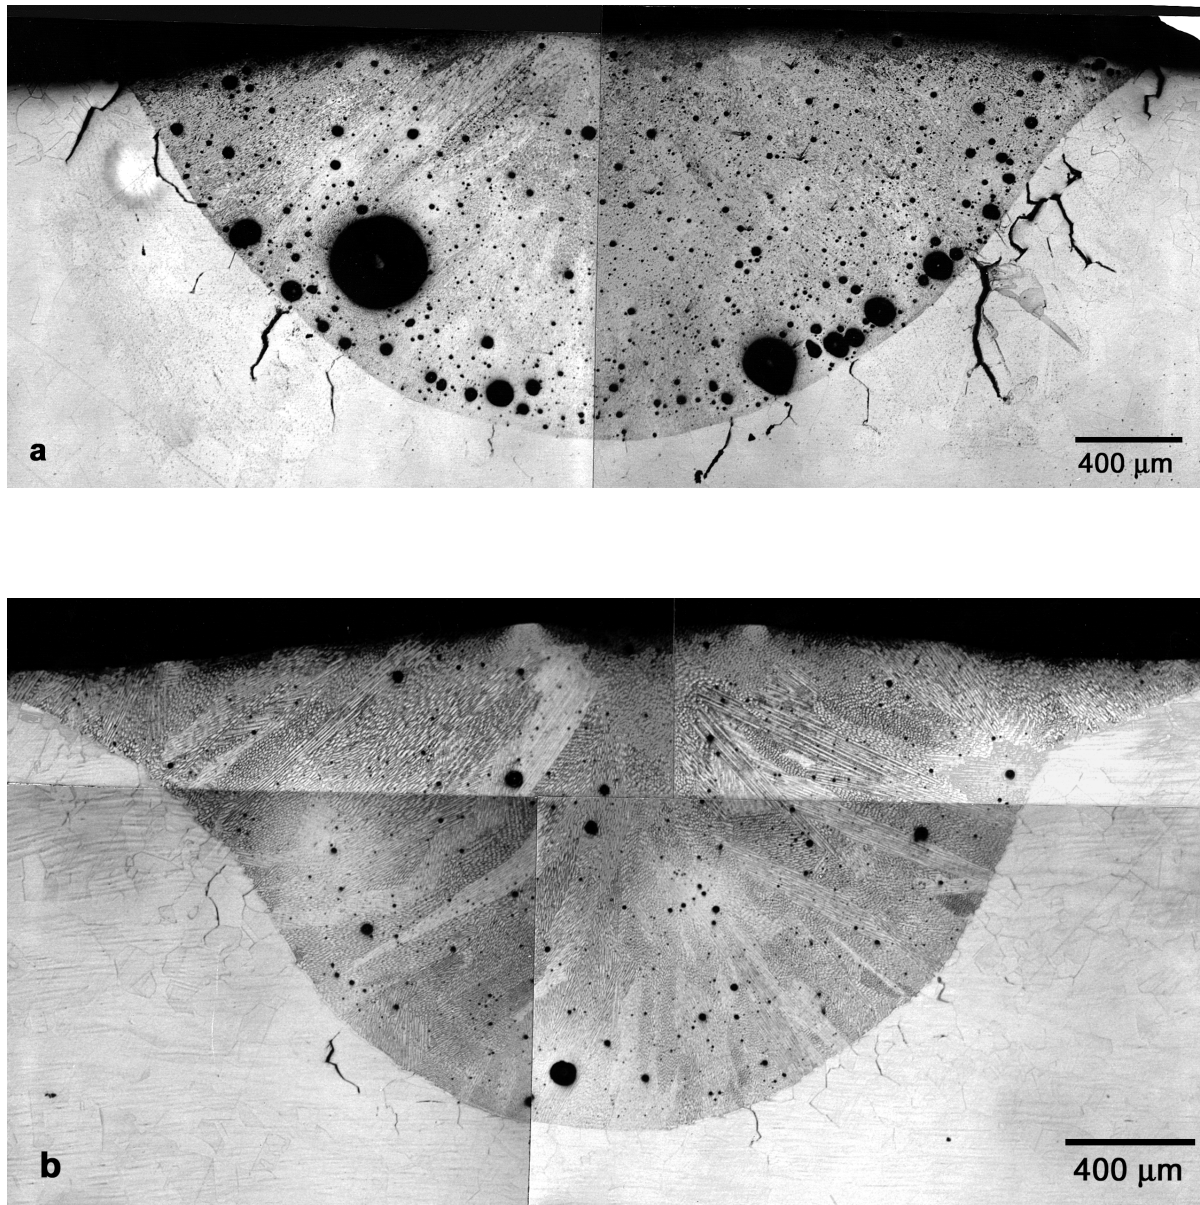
Cross-section of stringer beads in the a) 304 and b) 316LN plates. These welds were made using the same parameters. Notice the increased cracking and porosity in the 304 weld.
